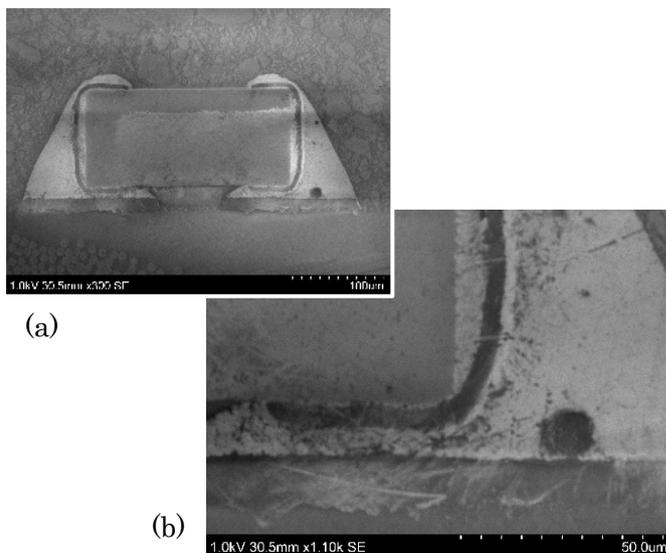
(a) SEM image showing the cross-section of 0201 chip capacitor. (b) Magnified solder.
